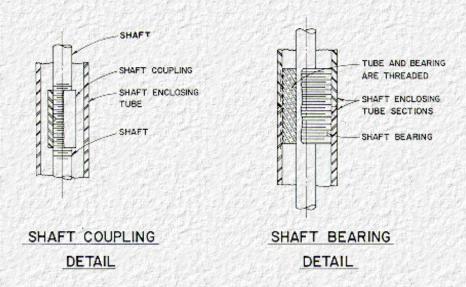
Pump Shaft Details, Pump Pedestal Design
